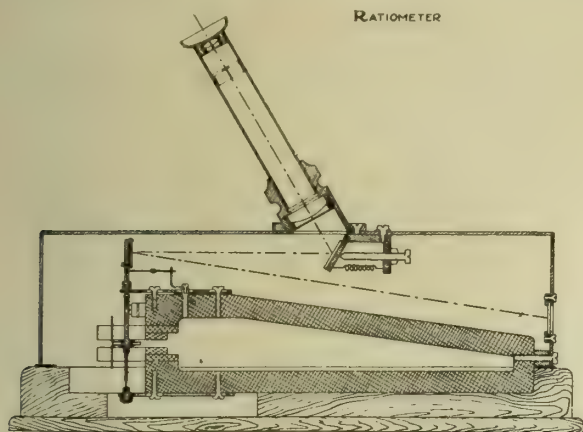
SECTIONAL VIEW OF RATIOMETER.
